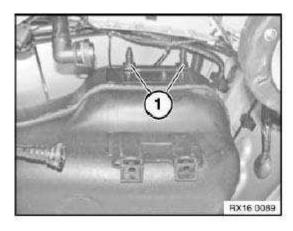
Carbon Canister Guide Courtesy of BMW OF NORTH AMERICA, INC.
